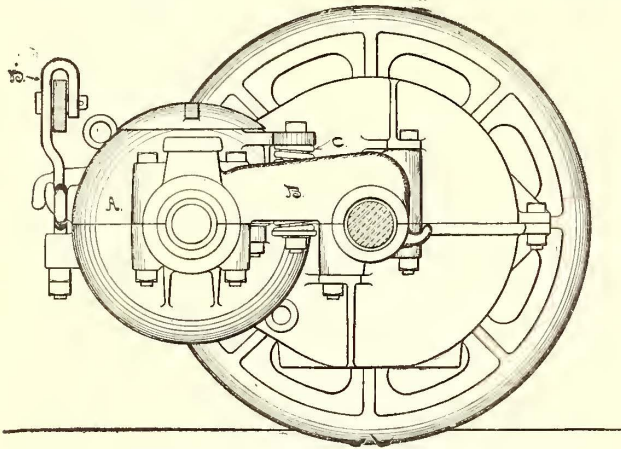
METHOD OF SUSPENSION—STEEL MOTOR.
